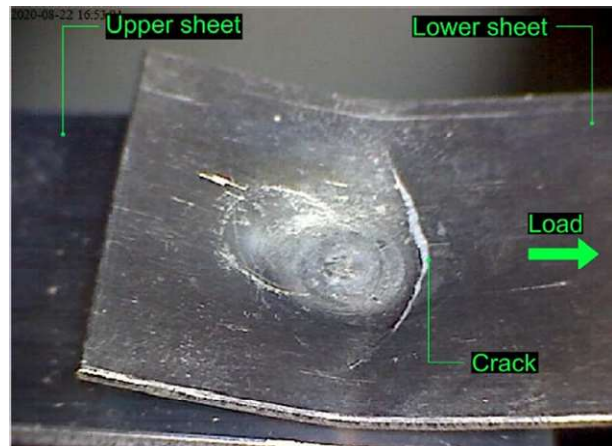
View of the lower sheet with a visible crack due to tensile stress at the perimeter of the weld
